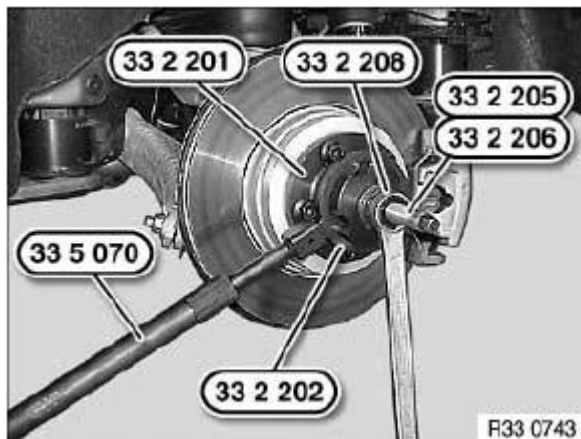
Identifying Special Tool (33 2 201) With Wheel Studs To Drive Flange
